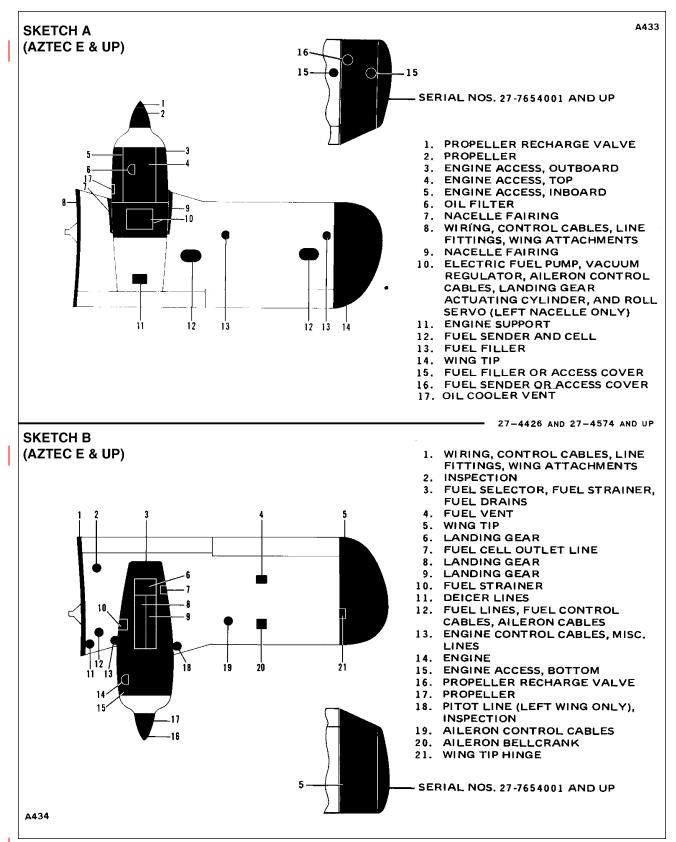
Access Plates and Panels PA-23-250 (six place) (Sheet 3 of 5)
